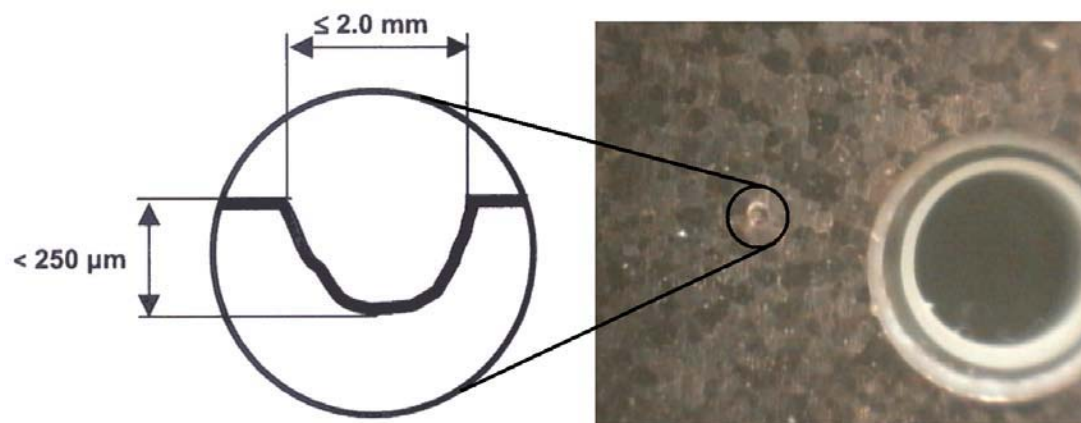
Acceptable etching hollows at the MiniSKiiP bottom surface
